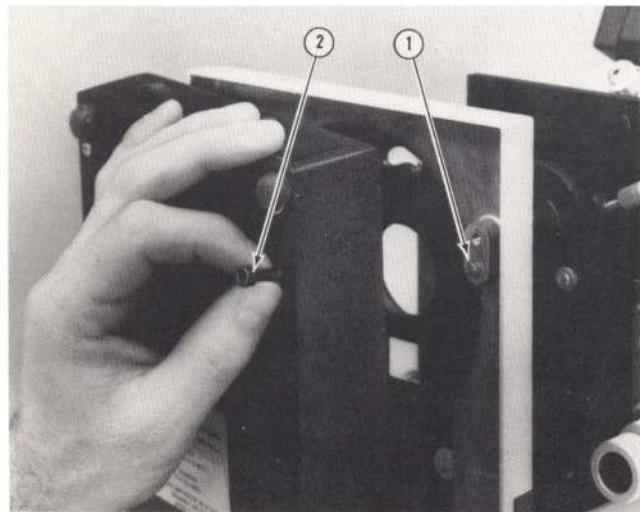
REMOVING THREE SCREWS IN BASE
